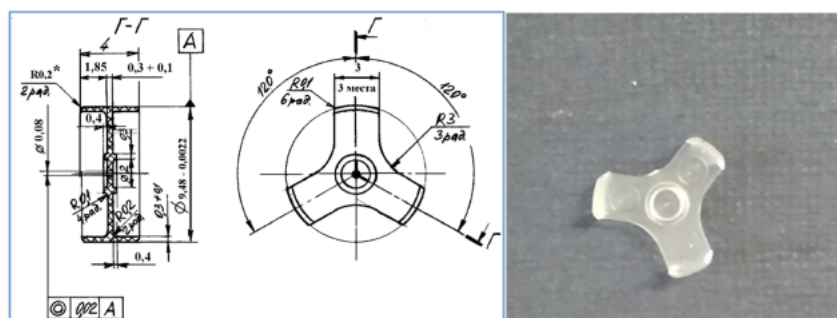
Technical drawing (left) and photo (right) of the internal backing of the signal spacer wire.
